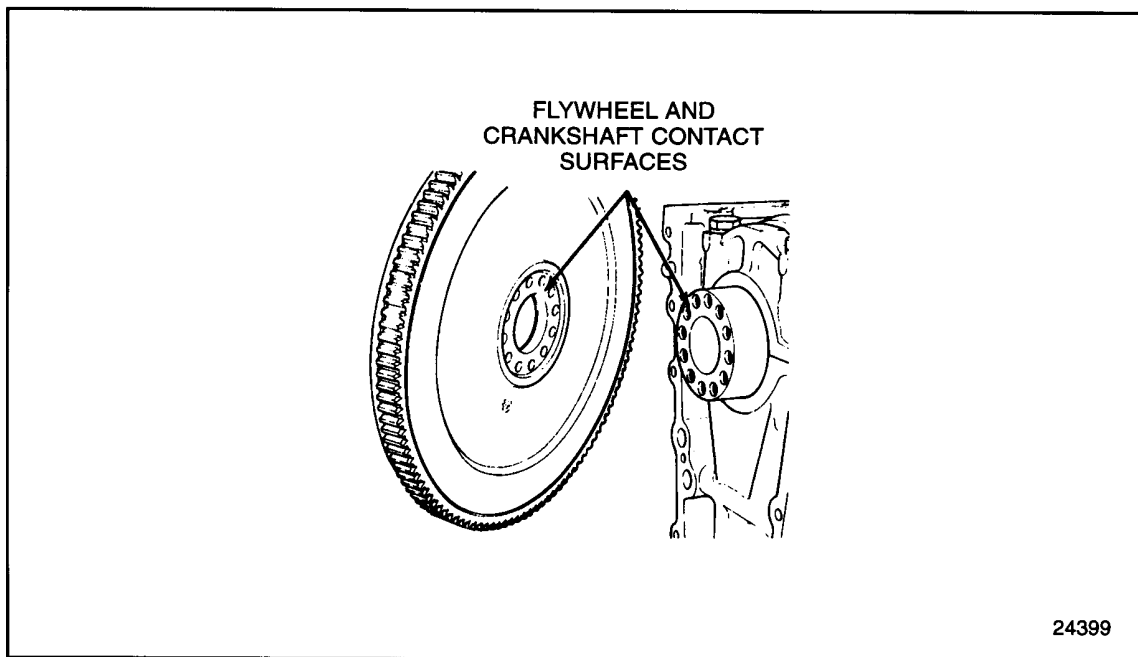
Crankshaft and Flywheel Mating Surfaces
